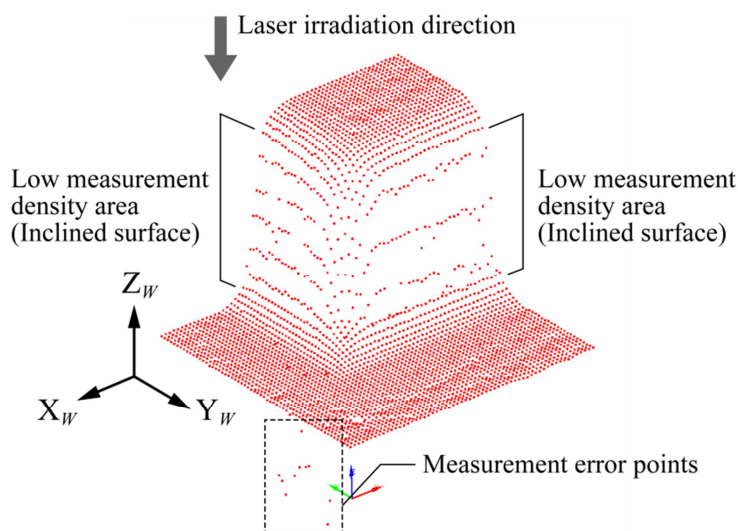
Shape measurement result of the workpiece with high inclined surface
